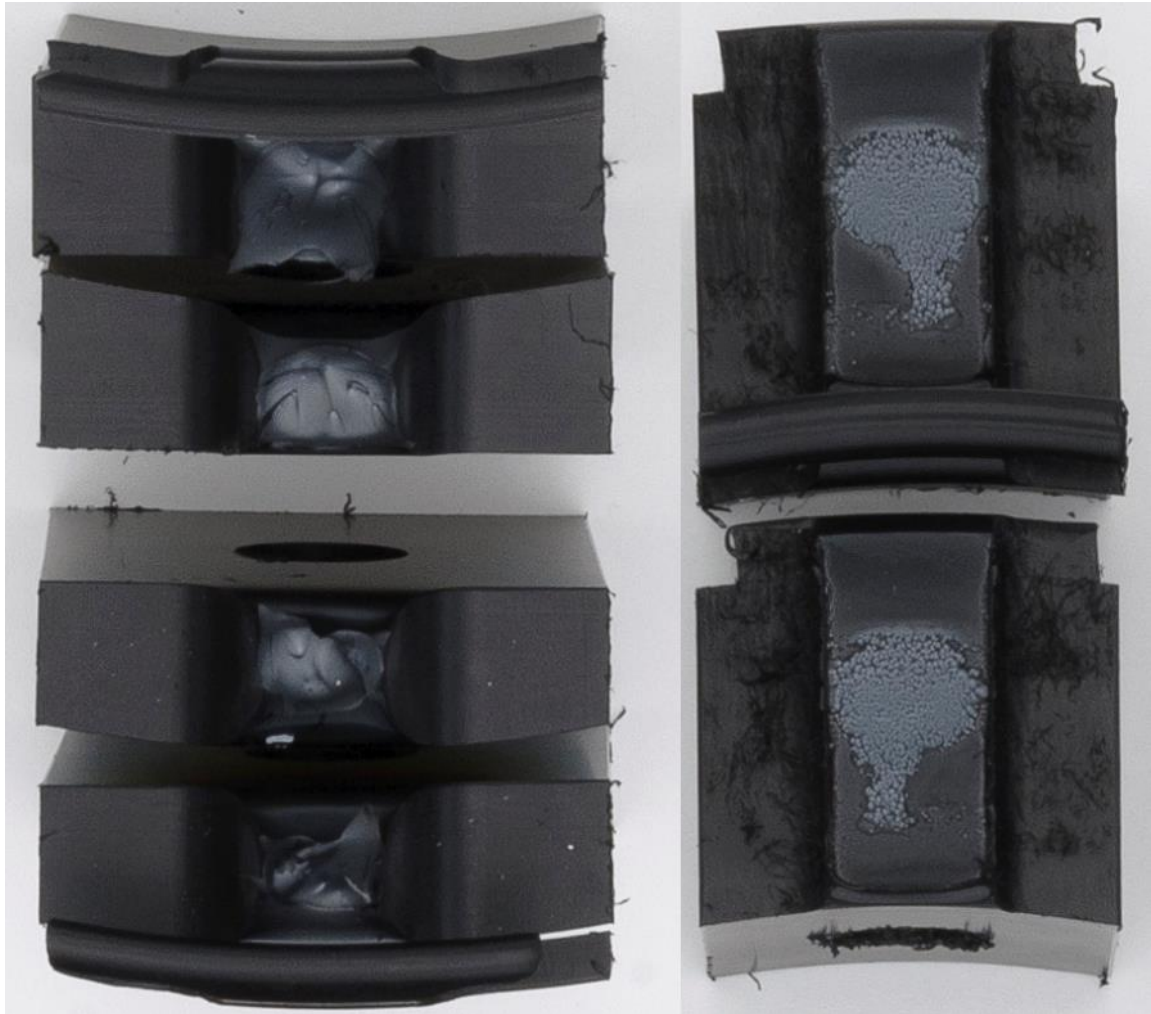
, Fracture surface for welded modified specimen on the left (PEB213) and welded standard specimen on the right (PEB206) from 500mm OD pipe and from the same weld
